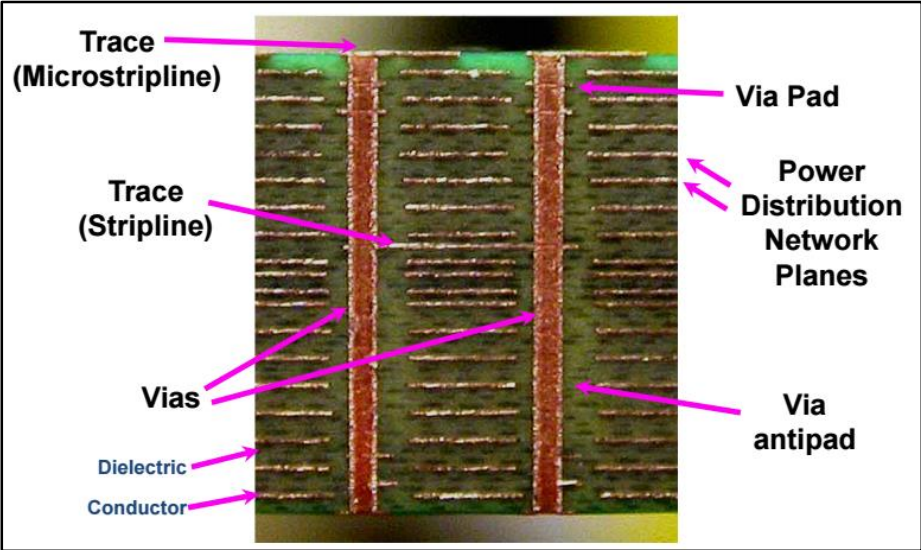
Printed Circuit Board (PCB) Cross Section [7].
